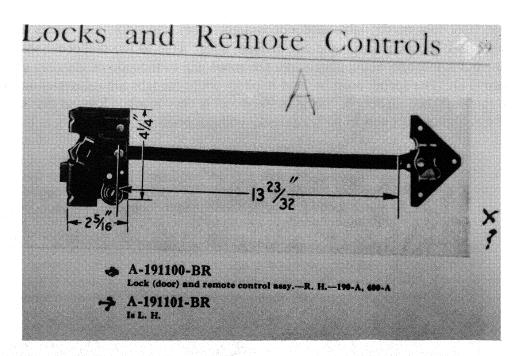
Ford drawing of Locks and Remote Control with dimensions as depicted in The Automotive Hardware and Trimming Supplies Manual 1928-1938
